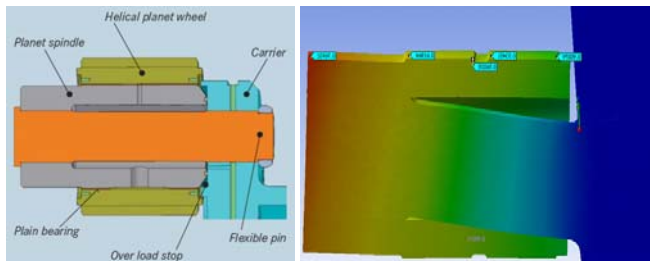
Left: Flexpin design [6]. Right: FEM analysis of Flexpin
